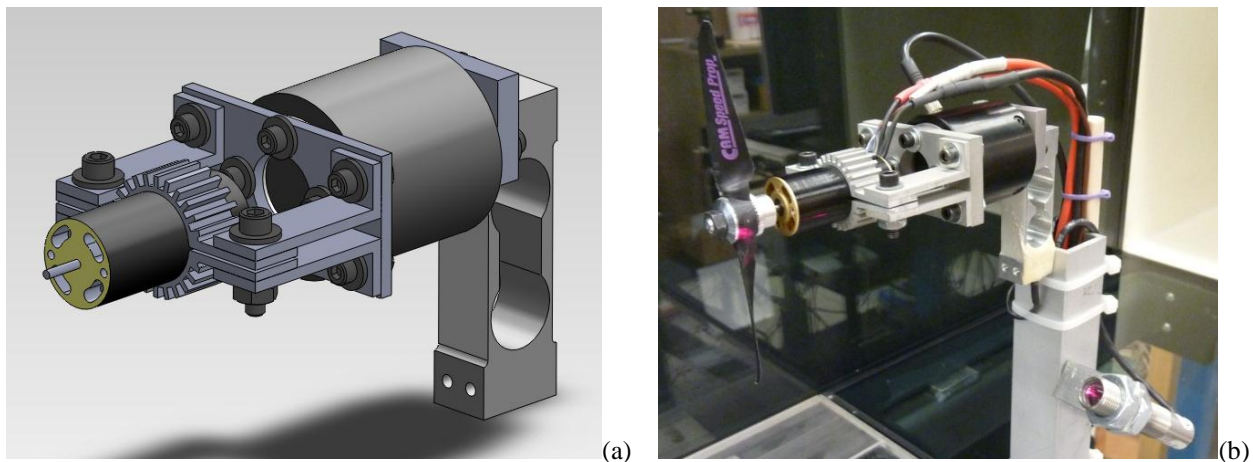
Assembly of Motor, Torque Cell and Load Cell: (a) Solid Model Representation; (b) Photograph.
